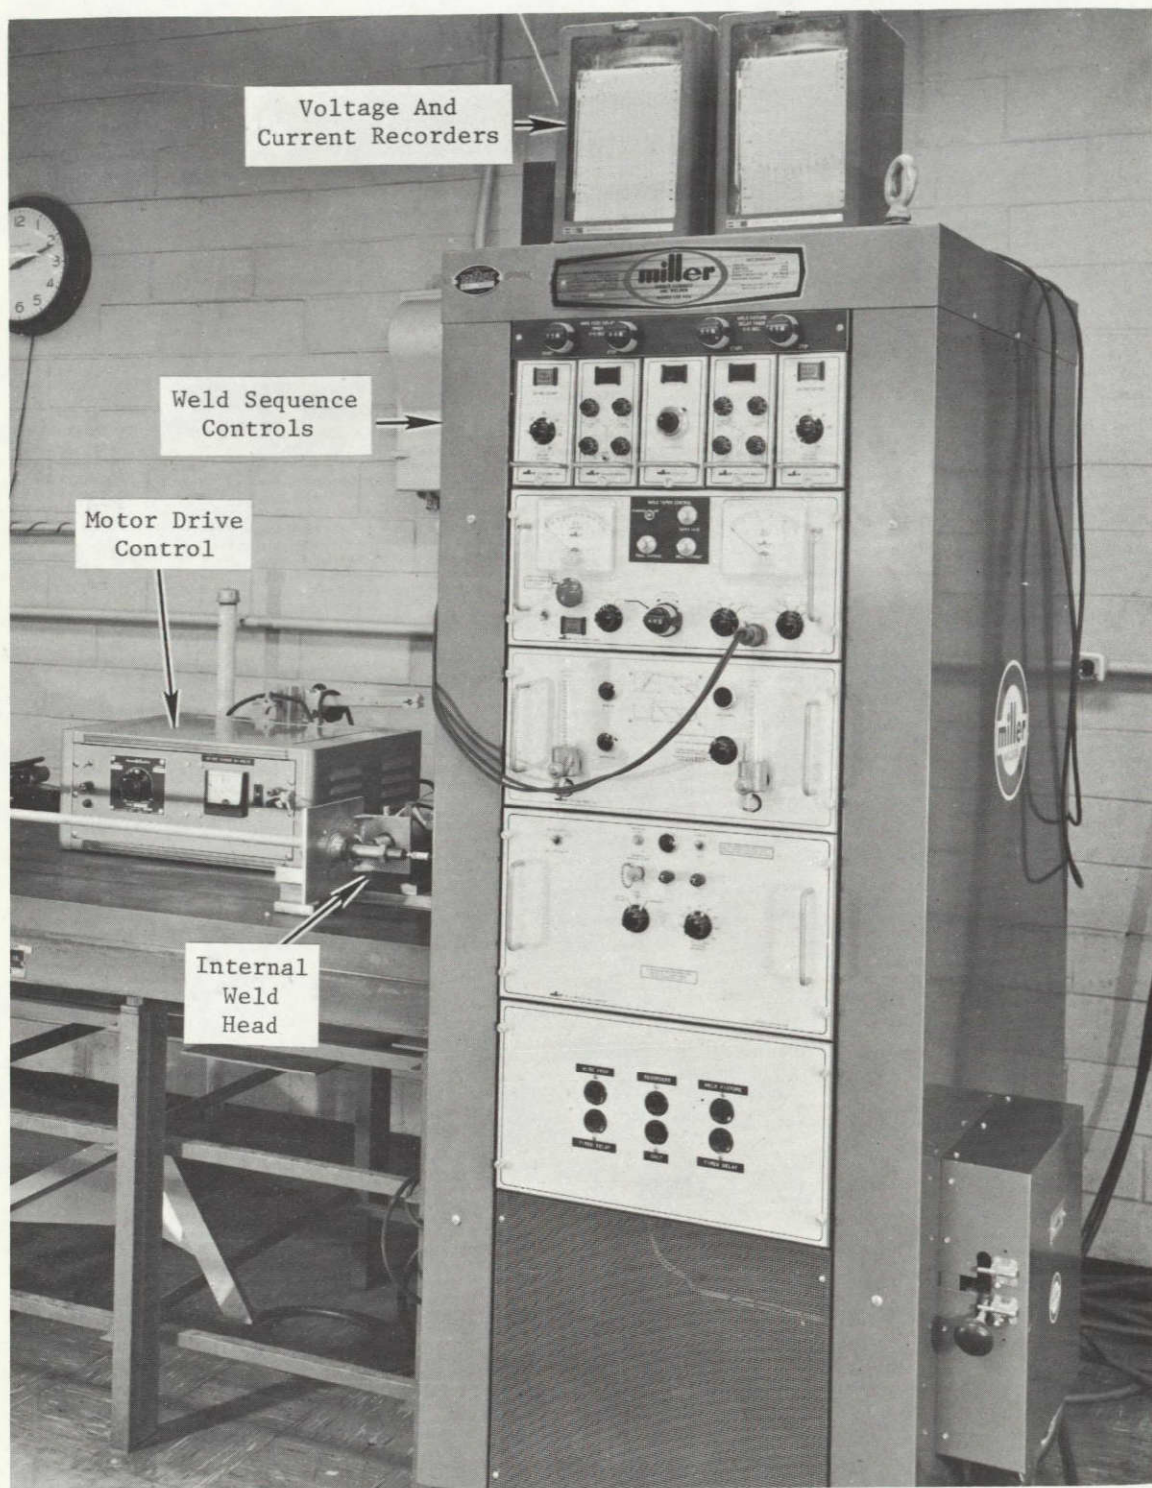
Automatic Tungsten Inert Gas Welding Machine Controlled Welding Sequences. (C67020850)
